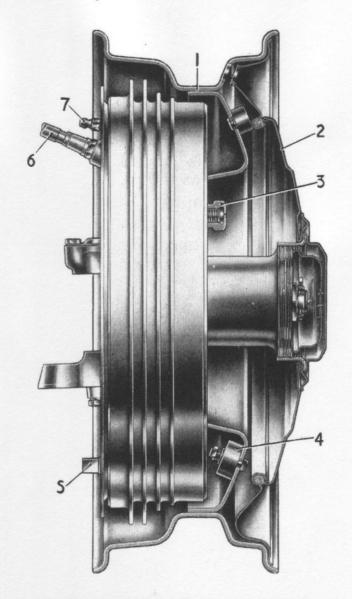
SECTION OF FRONT HUB AND WHEEL.
